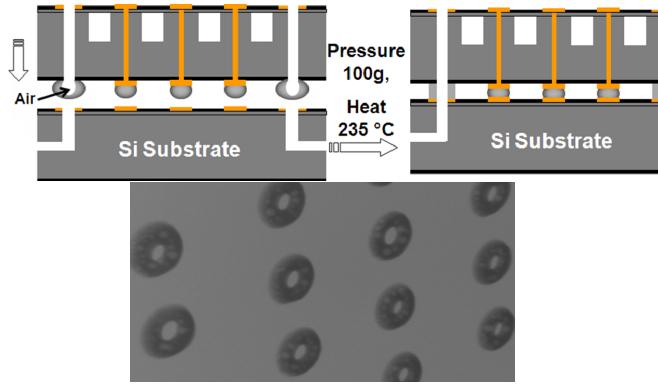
Assembly of solder-based fluidic I/O interconnects. X-ray image of air-gap C4 fluidic I/Os after assembly is also shown.
